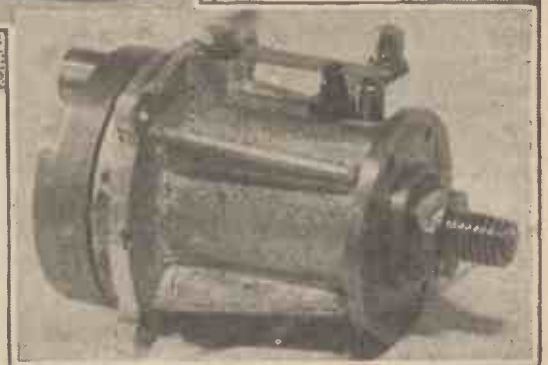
The front bearing with contact-breaker mechanism assembled.
